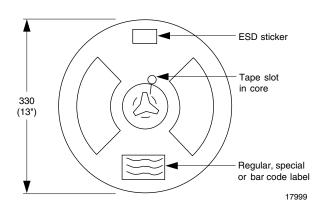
Tape and Reel Shipping Medium (EIA-481, revision A, and IEC 60286), 2000 units per reel
